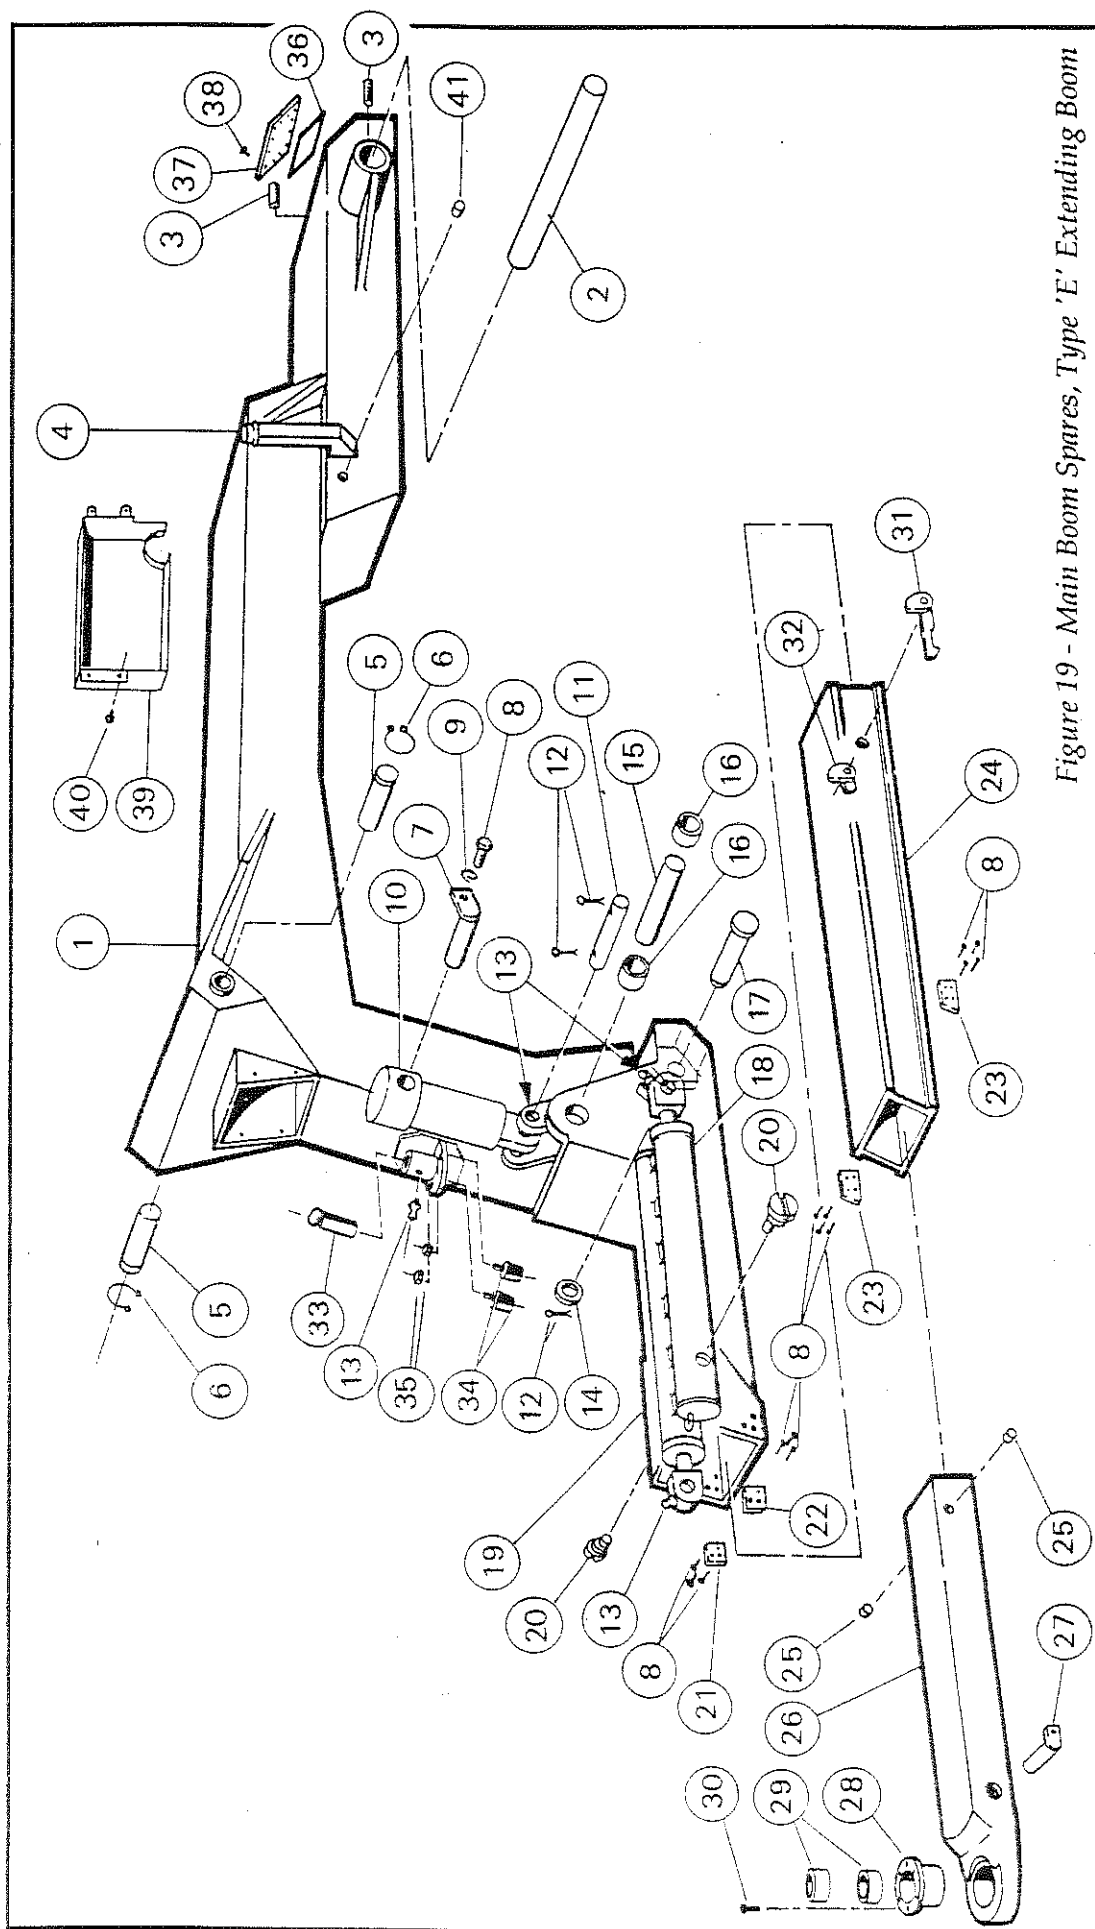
Main Boom Spares, Type 'E' Extending Boom
